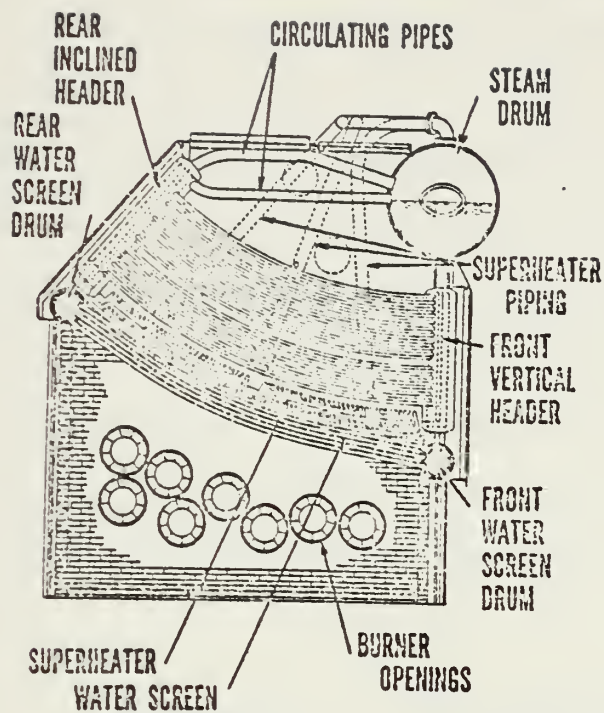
SECTIONAL EXPRESS TYPE BOILER - 1939
